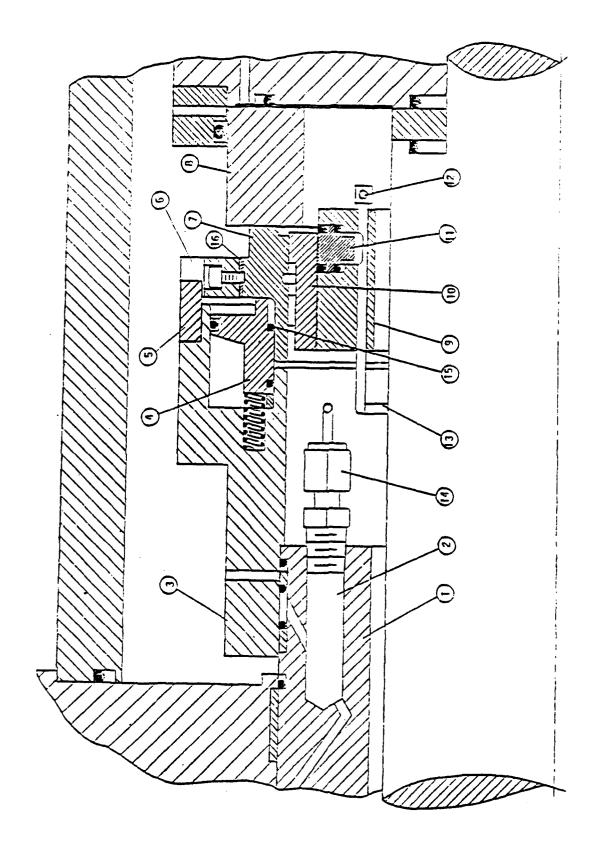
Nine-wave Seal Assembly View, Second Design.
